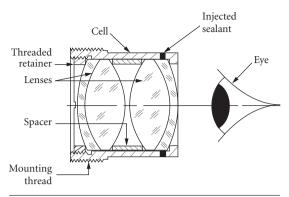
A telescope eyepiece with two lenses and a spacer assembled by the "drop-in" method.
